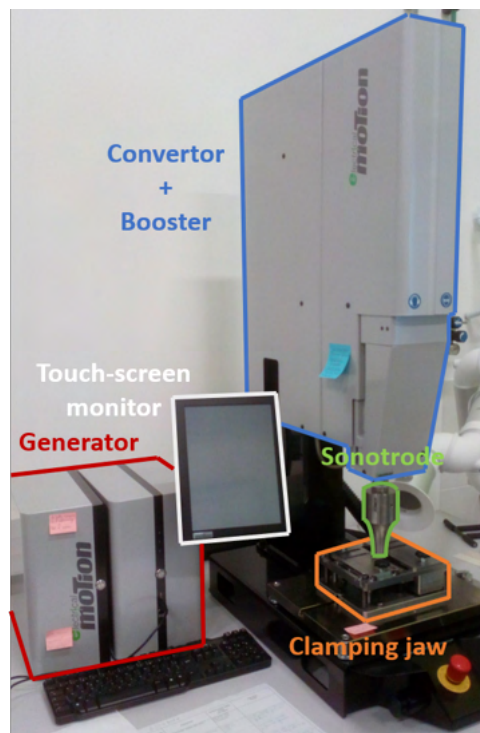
Electrical Motion 20 (Rinco Ultrasonics) ultrasonic welding equipment
